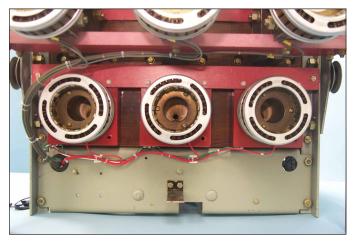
Primary Disconnects Reinstalled on the Breaker and Routing of the PT Wires.
